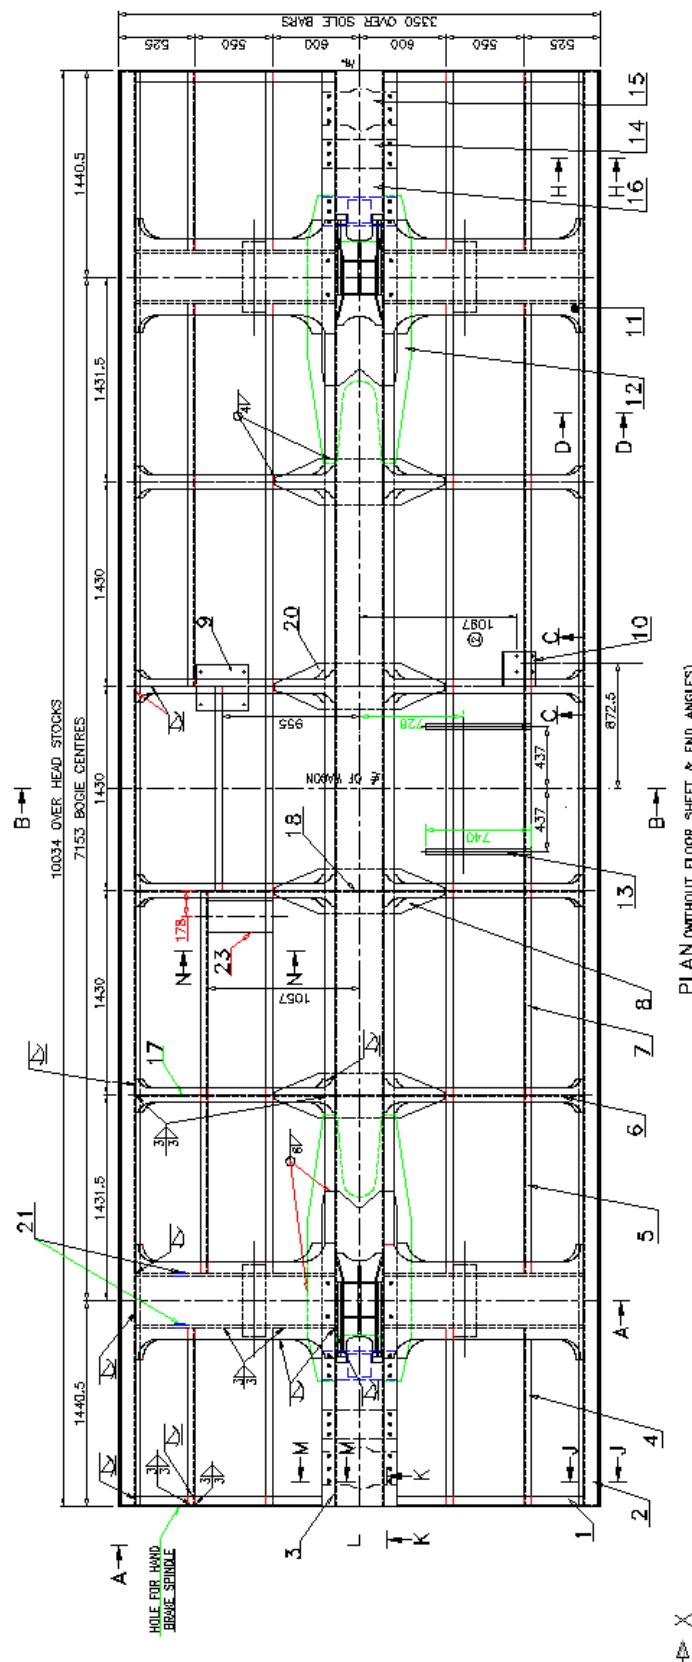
BOGIE COVERED WAGON TYPE 'BCNHL' UNDERFRAME ARRANGEMENT
